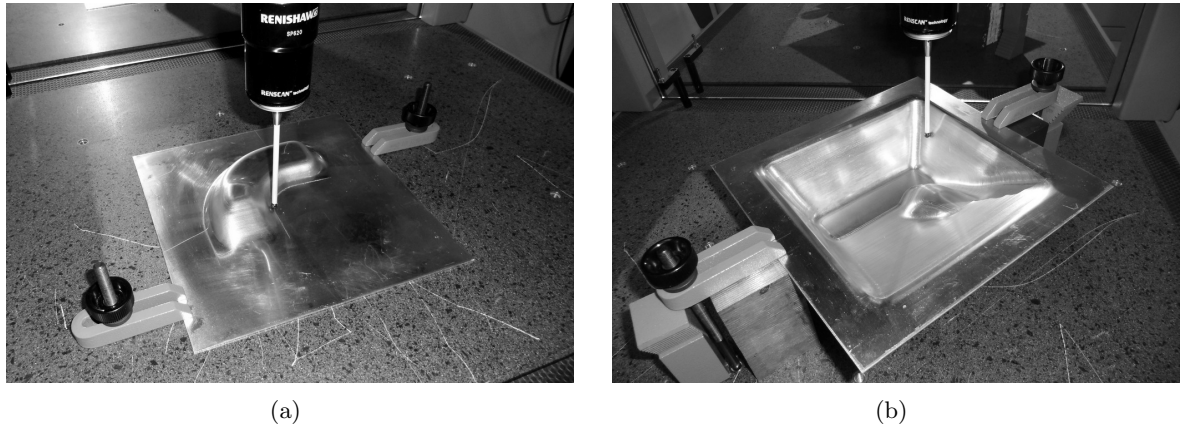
Rotomoulding sheet metal moulds dimensional measurement: (a) lower side (b) upper side
